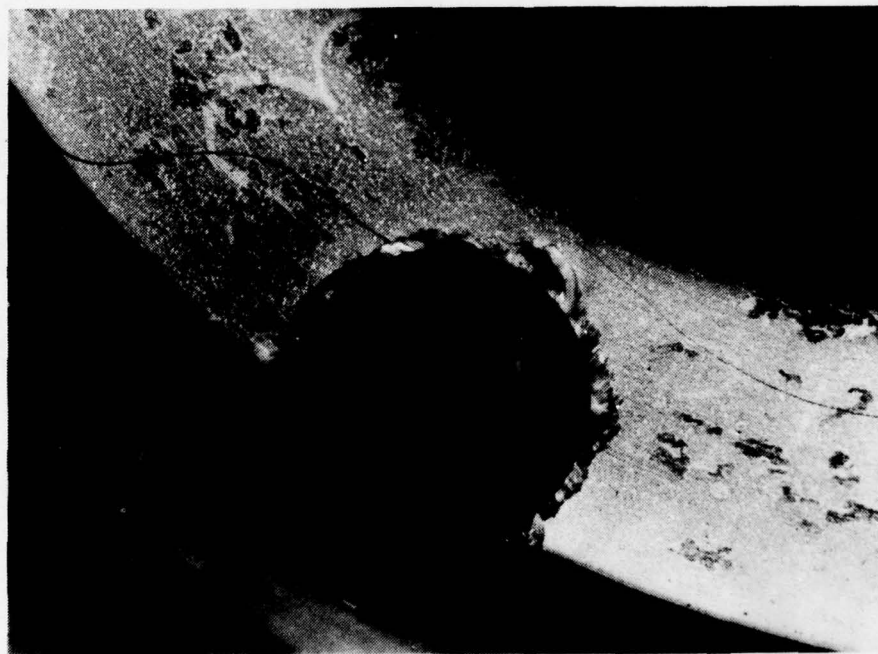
All-Ceramic Nozzle After 50 Hour Engine Run (Note fracture at bottom section of RBSi_3N_4 rear shroud) (Sheet 1 of 3)
